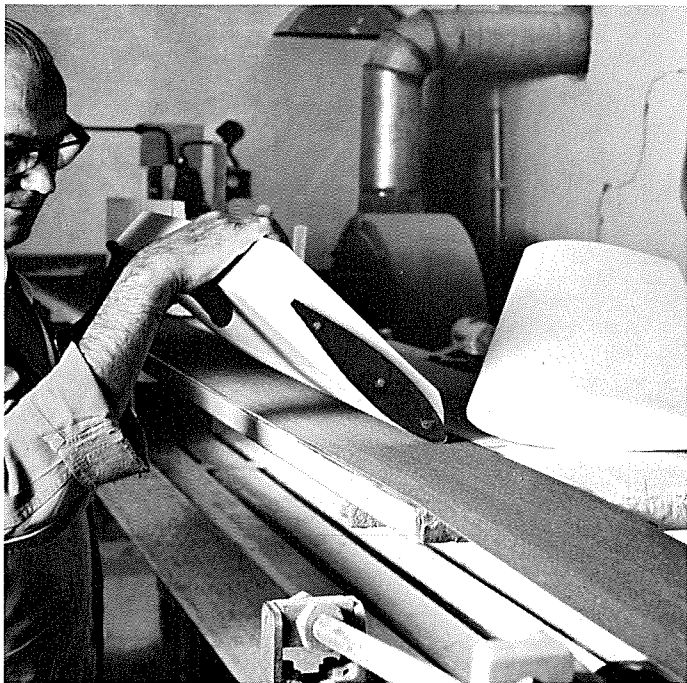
The foam sheet can be shaped by sanding, using a steel template fixed to the sheet. Sanding is either done with an abrasive belt or by hand on a wheel stand. For large parts one uses a board covered with abrasive paper, which is drawn across the template by hand. Where a large number of articles must be shaped by sanding this template would wear excessively. In this case one uses a frame above the belt to which undersized templates are attached and guided towards the belt.
